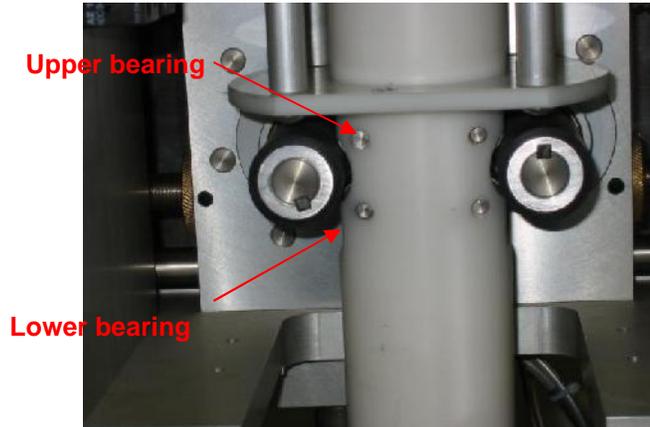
Lower Mandrel to align rubber drive rollers to mandrel bearings. Rubber drive rollers should sit between upper and lower mandrel bearings
